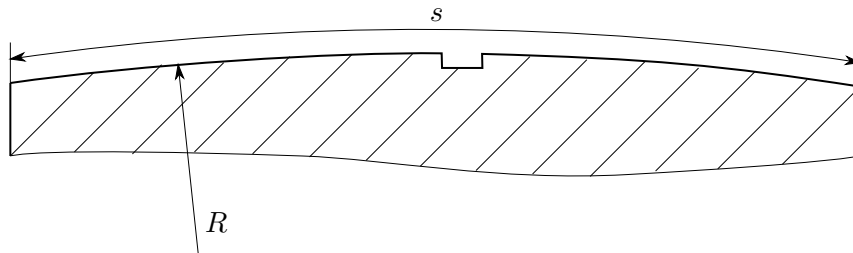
Drawing of upper crosshead sliding shoe, frontal view: s is the arc length, defining the width of the sliding shoe, R is its radius.
